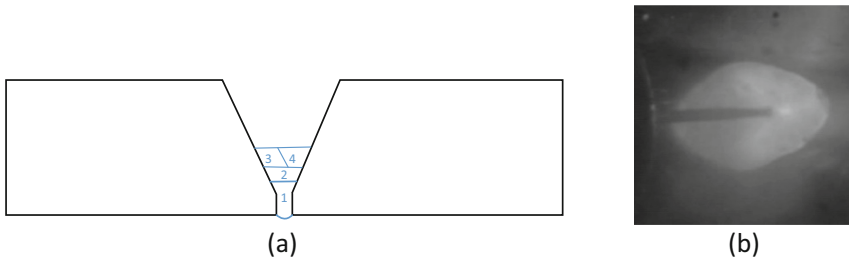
(a) Schematic diagram of weld bead filling. (b) (a) corresponding molten pool image.
